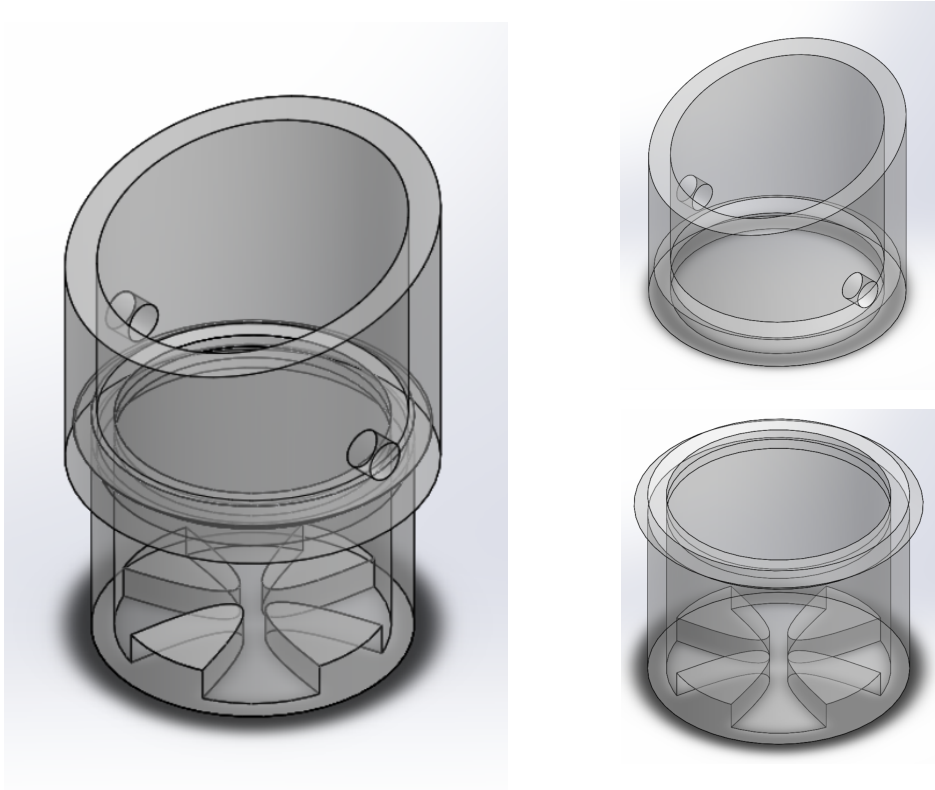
(left): SolidWorks assembly of entire endoscopic dissecting cap
